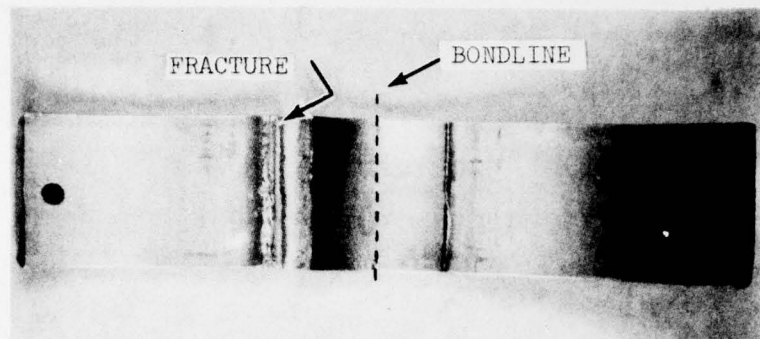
BEND TEST COUPON FROM PRE-FORM S/N 6 AFTER STRESS RELIEF. ARROW DENOTES FRACTURE AT STRESS RISER, CHANGE IN SECTION DUE TO METAL FLOW.
